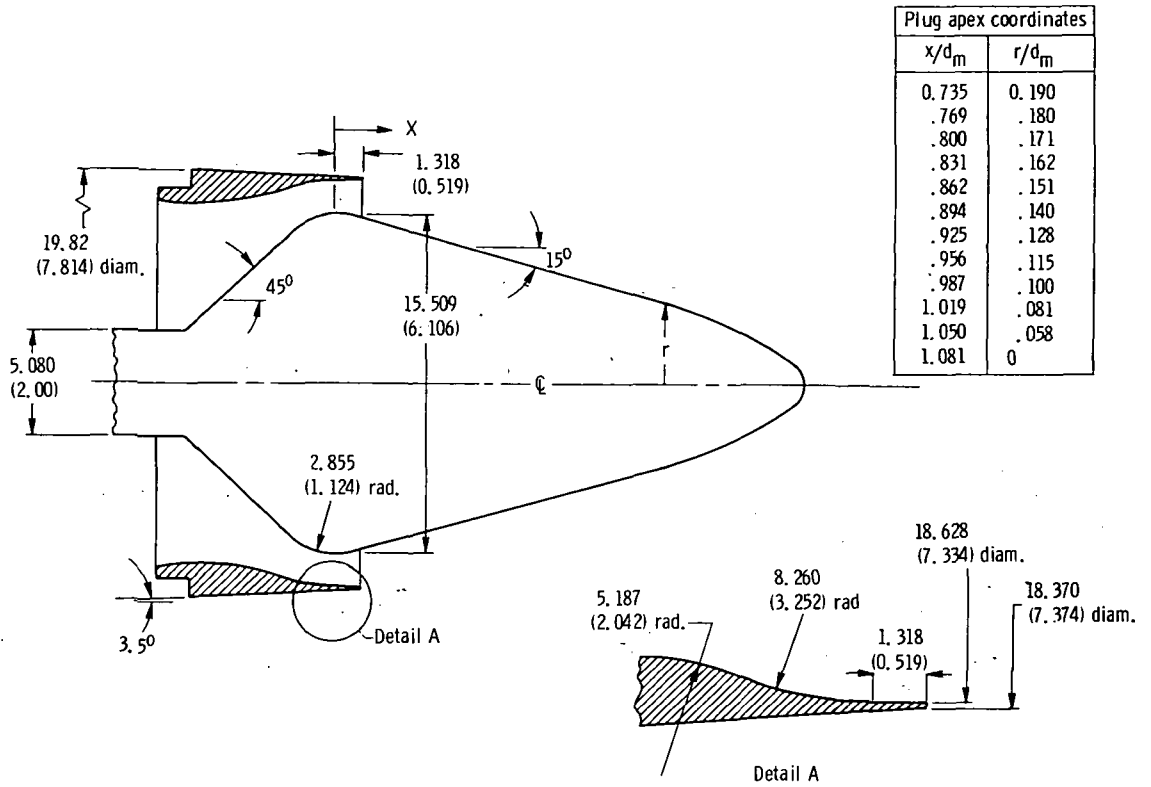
Unsuppressed plug nozzle geometric details. (All dimensions are in cm (in.))
